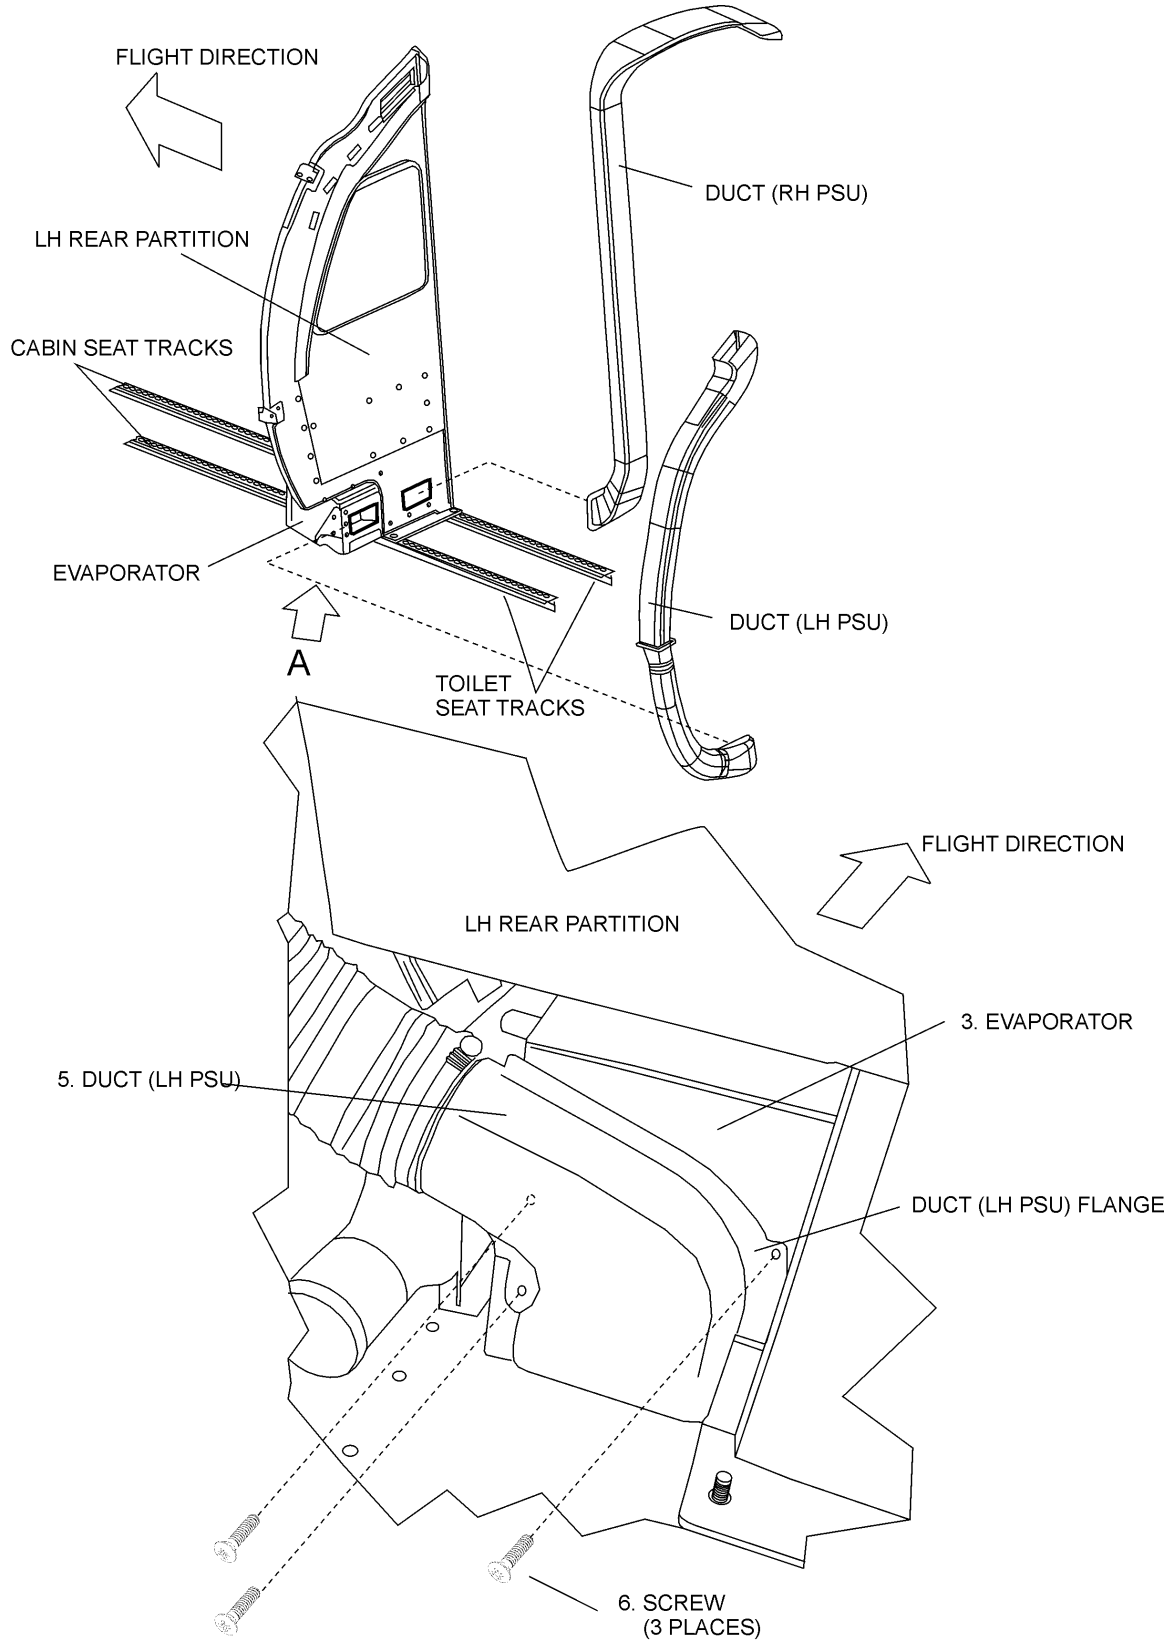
Evaporator - Removal/Installation (Sheet 1 of 2)
